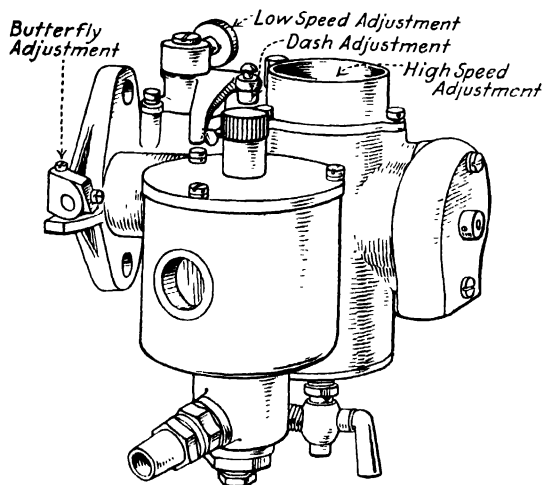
Carburetor Having a Side Flange for Connection to Engine Block.
